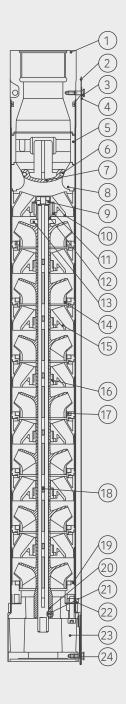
Cross-section view of 4 inch submersible radial flow pump
